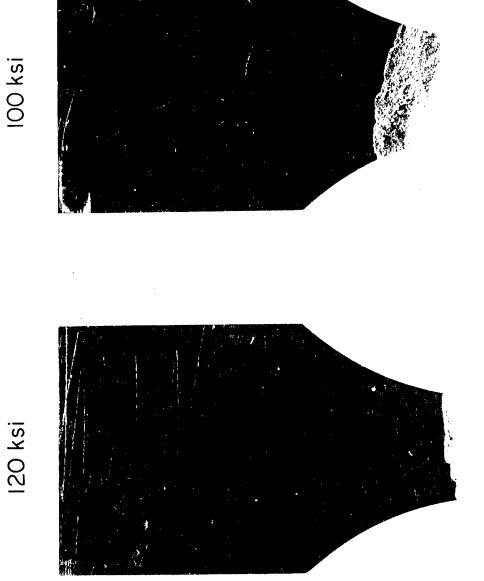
Fracture surface of Mo-O.5Ti molybdenum-alloy specimens after sheet-bending fatigue test.
